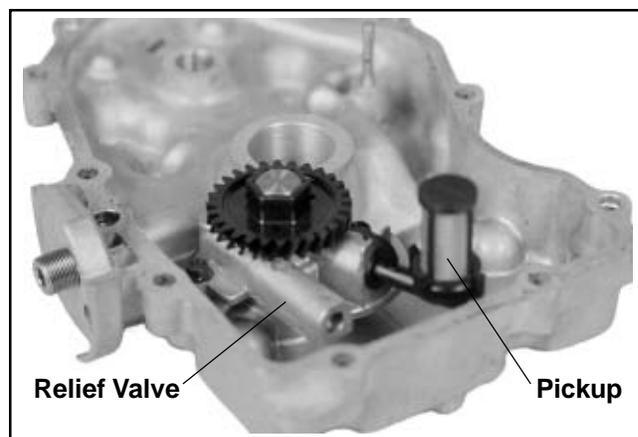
Oil Pump, Oil Pickup, and Relief Valve (Original Style).
